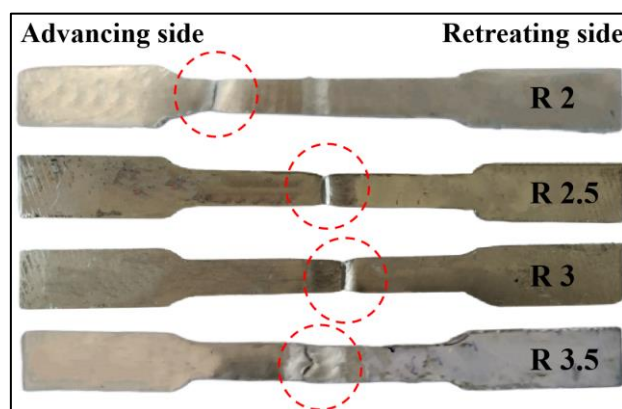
Fracture location of welded specimens for different tool ratios.
